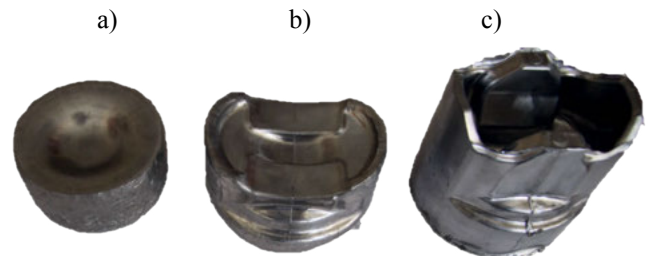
Forging shapes after operations of: a) flattening, b) initial forging and c) finishing forging of a lead piston
